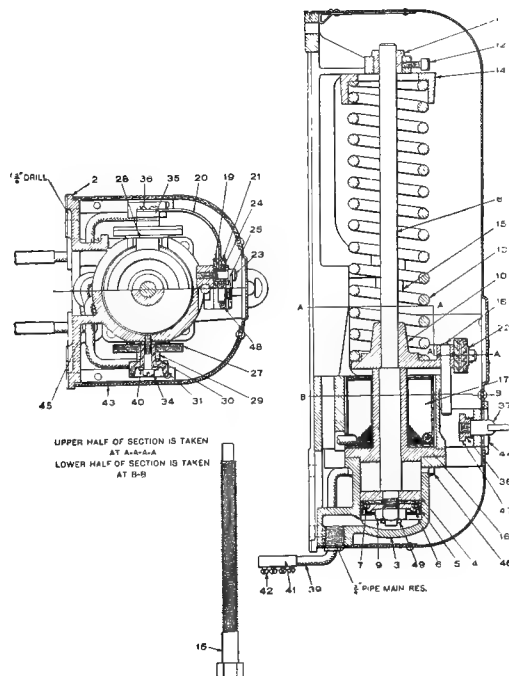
Electric Compressor Governor, Type G-1-B.
